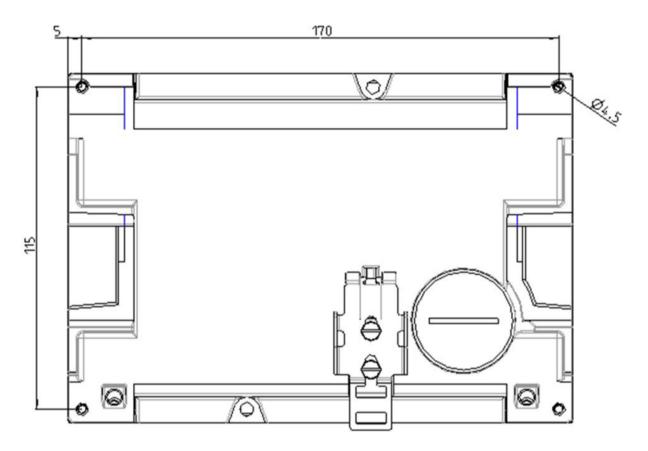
Large design dimension drawing (IE Switch X-320)
